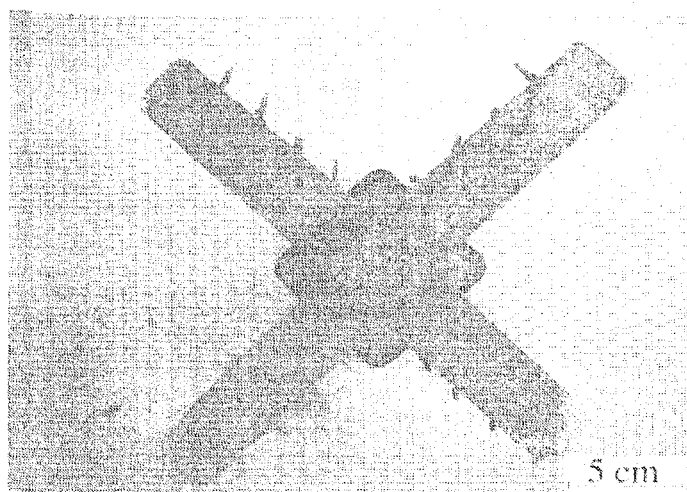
Casting: 660 °C / 1.6 pcf / with vacuum, bottom side.
